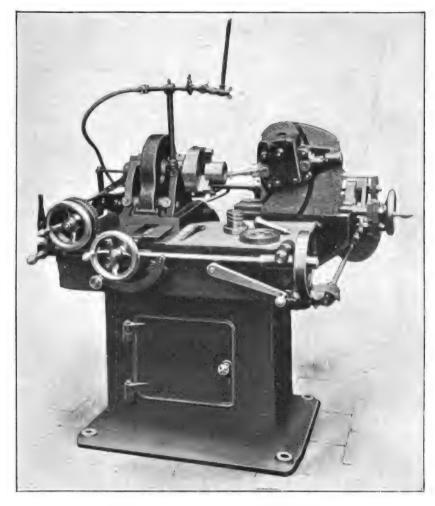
THE HOLROYD SCREW MILLING MACHINE.
